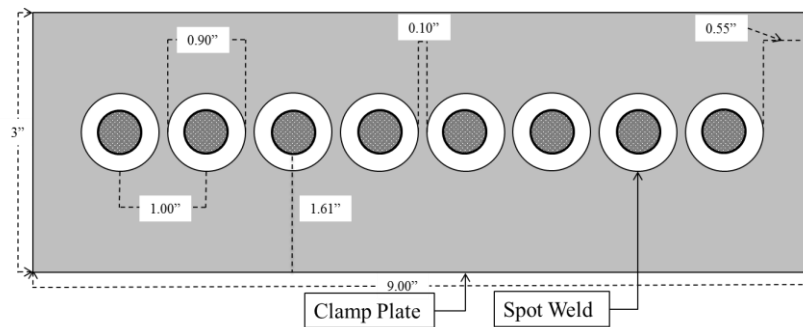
Clamp orientation relative to the spot welds for each sample. This clamp prevented the top plate from pulling away from the bottom plate during the spot welding process. The holes in the top plate were created off center for alignment purposes with the FSW machine.
